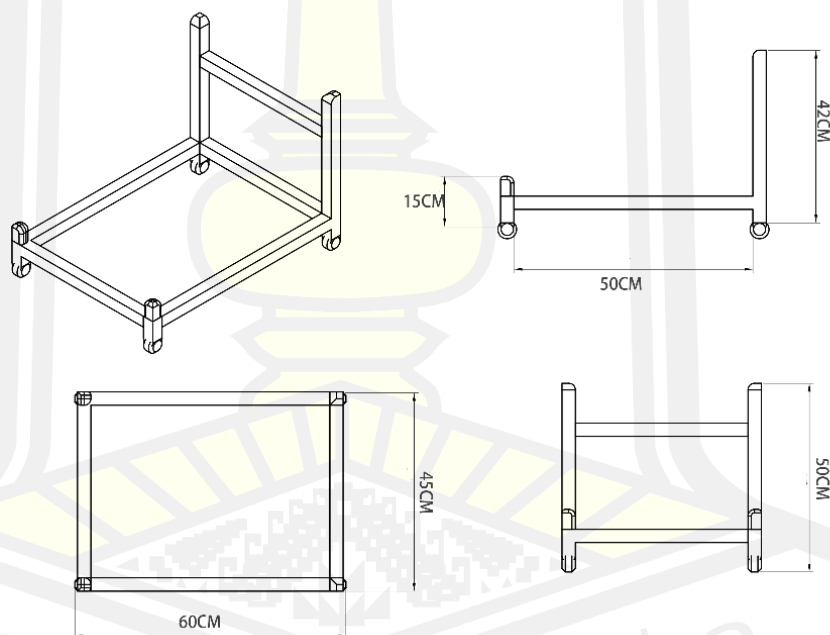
Mobile metal HuiGu with pulleys Rack design drawing
